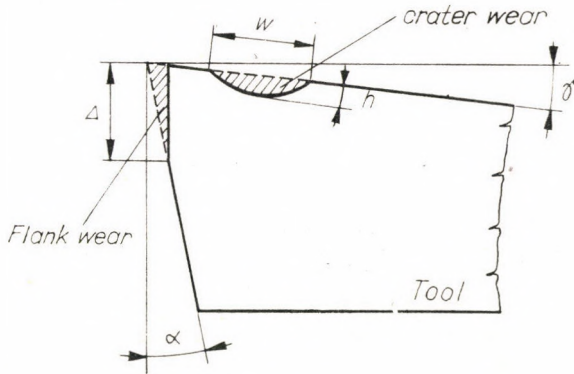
The profile of a worn cutting tool (cross-section taken perpendicular to the cutting edge)
